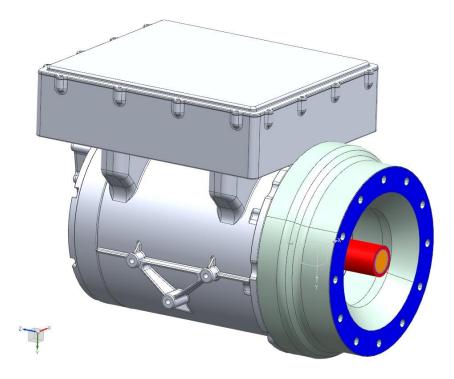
3D view of the motor and inverter with the gearbox connecting flange marked in blue
